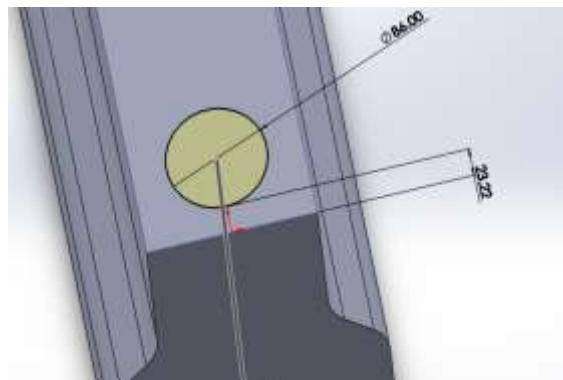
Cylinder Bore Sketch with Dimensions
